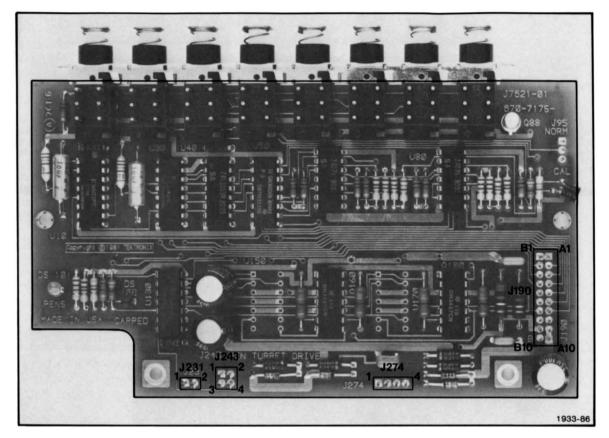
Pen Turret Drive Circuit Board Connectors.
